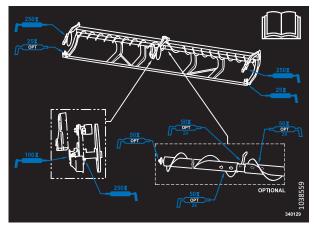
Decal for Double-Knife Header with Two-Piece Upper Cross Auger
